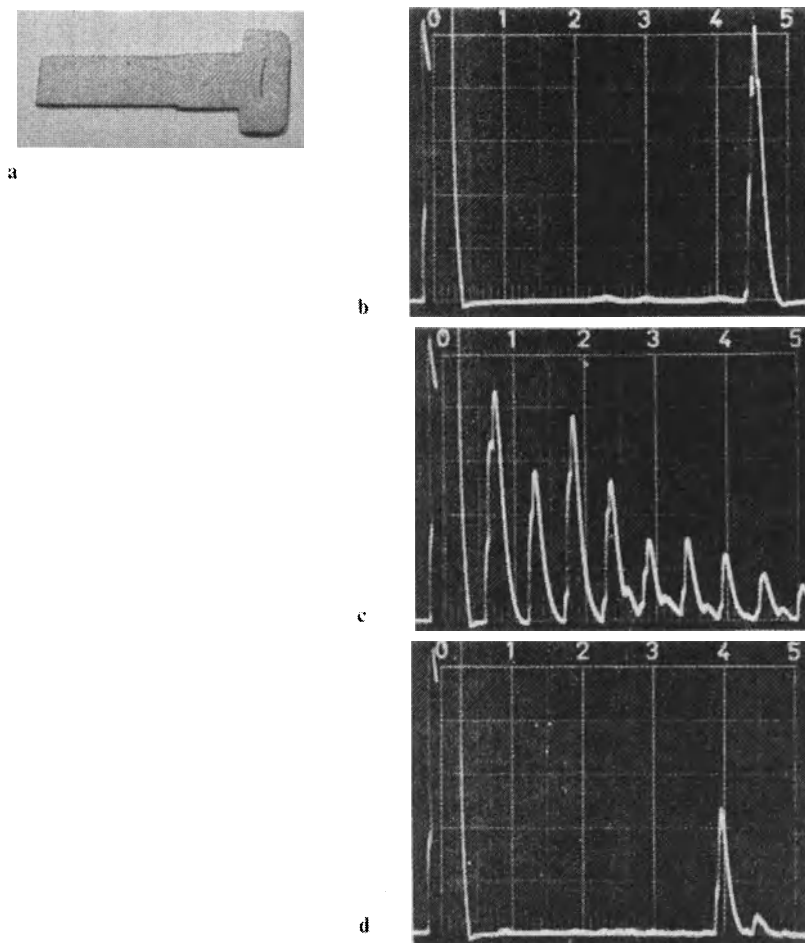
Testing an extruded screw for cracks in the head. a Crack in polished cross-section made visible by the magnetic powder method; b screen picture of a sound screw tested from the head, 4 MHz, testing range 50 mm; c ditto, of screw with flaw; d ditto, tested from base. In both cases the faulty screw is easily distinguished from a sound screw
